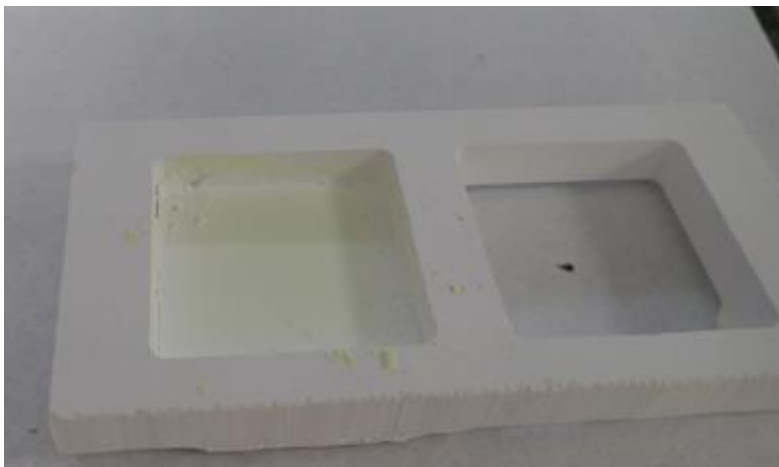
A discolored rigid sample fabricated by the TPSF inside the mold after sintering.
